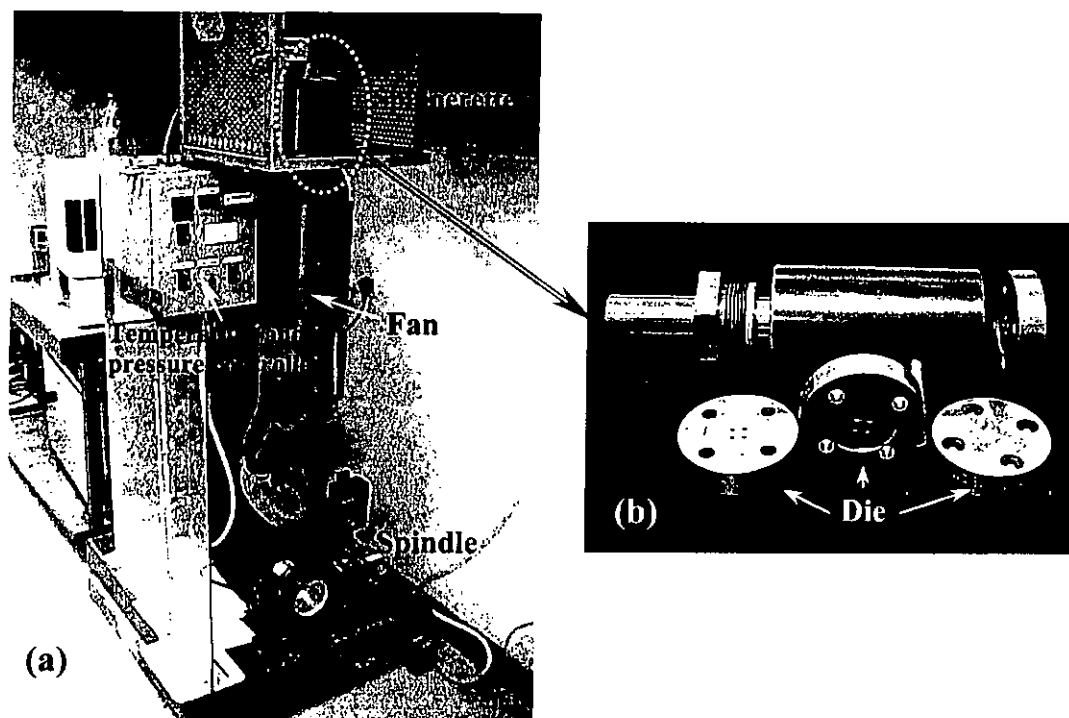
Photograph of the fibre extrusion machine and the spinnerette with different dies.
